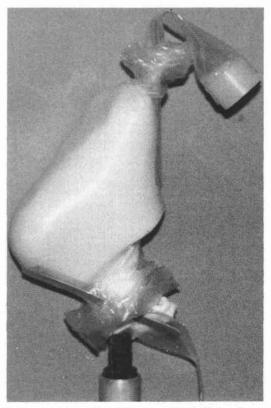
Completed layup with P.V.A. sleeve and feeder tubes in place
